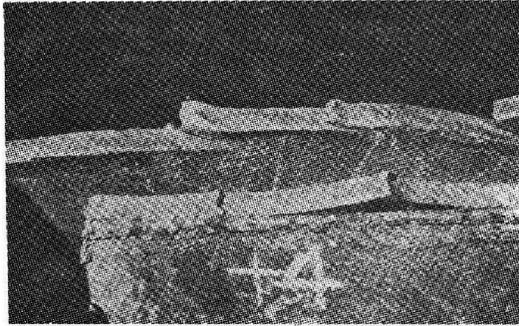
Fractured surface of the roof dome joint showing brittle fracture x 0.3
